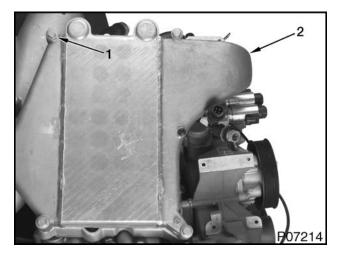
Low Pressure Charge Air Cooler (LPCAC)
